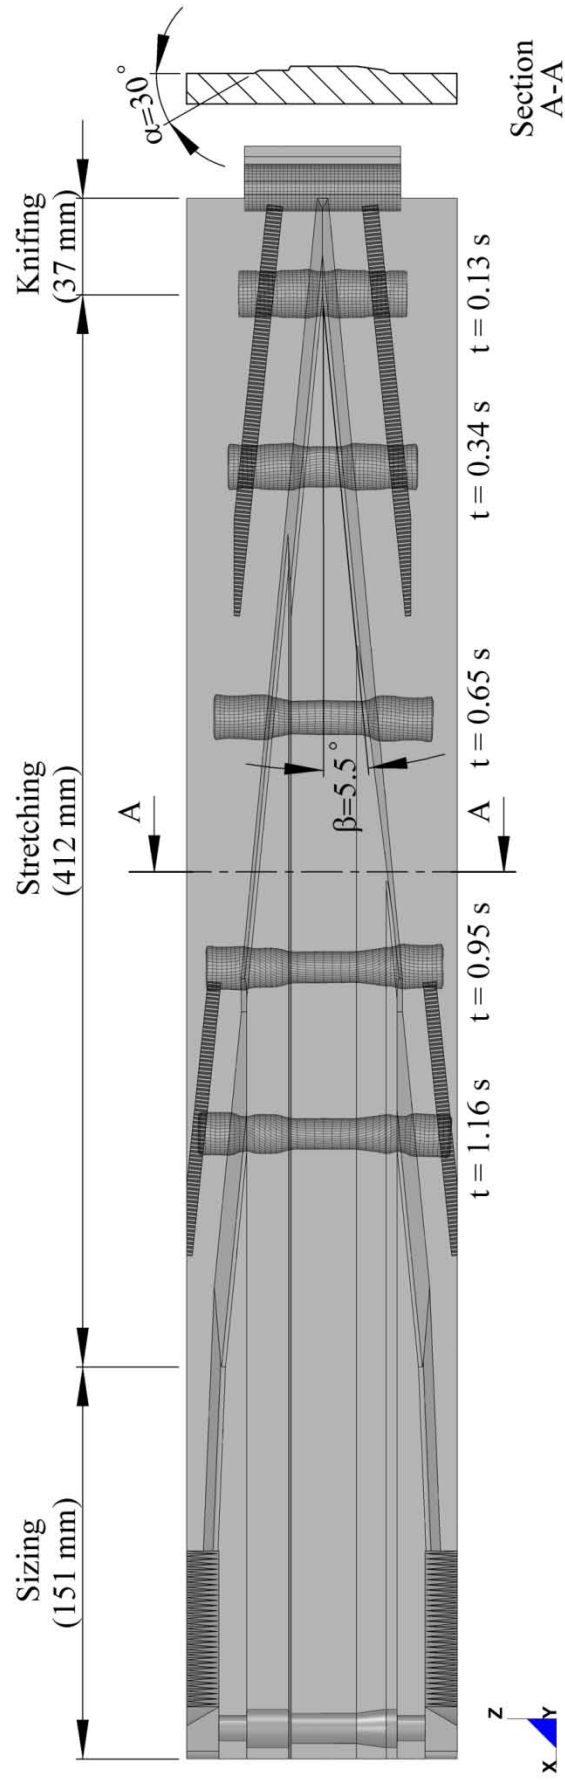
Illustration of deformation zones on tool geometry and ghost view of workpiece (workpiece) deformation steps.
